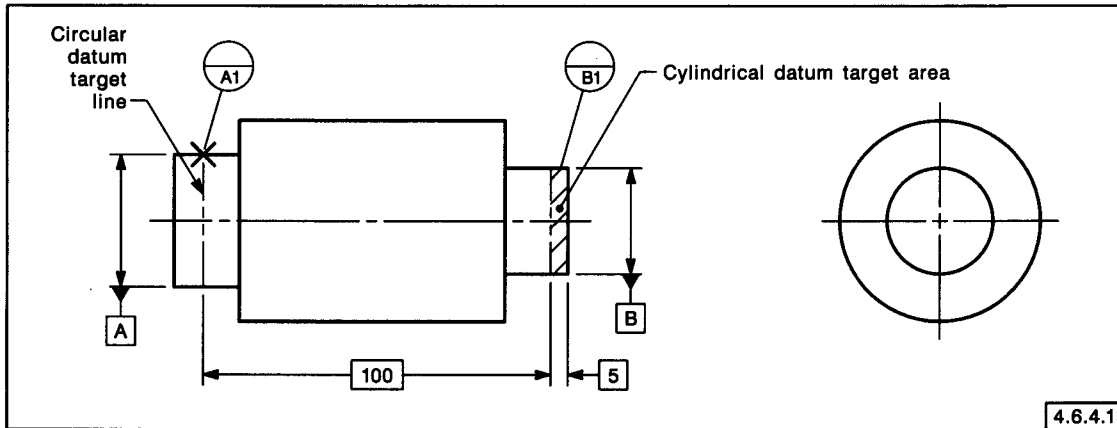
DATUM TARGET LINES AND AREAS
